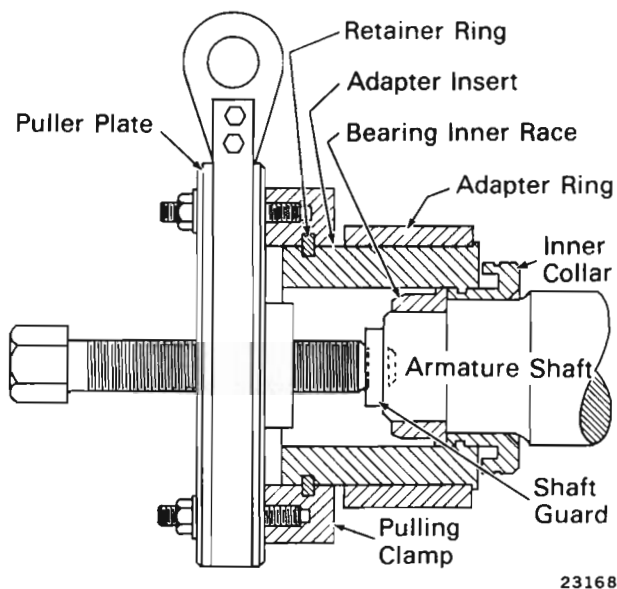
Removing Commutator End Bearing Inner Race And Inner Collar
